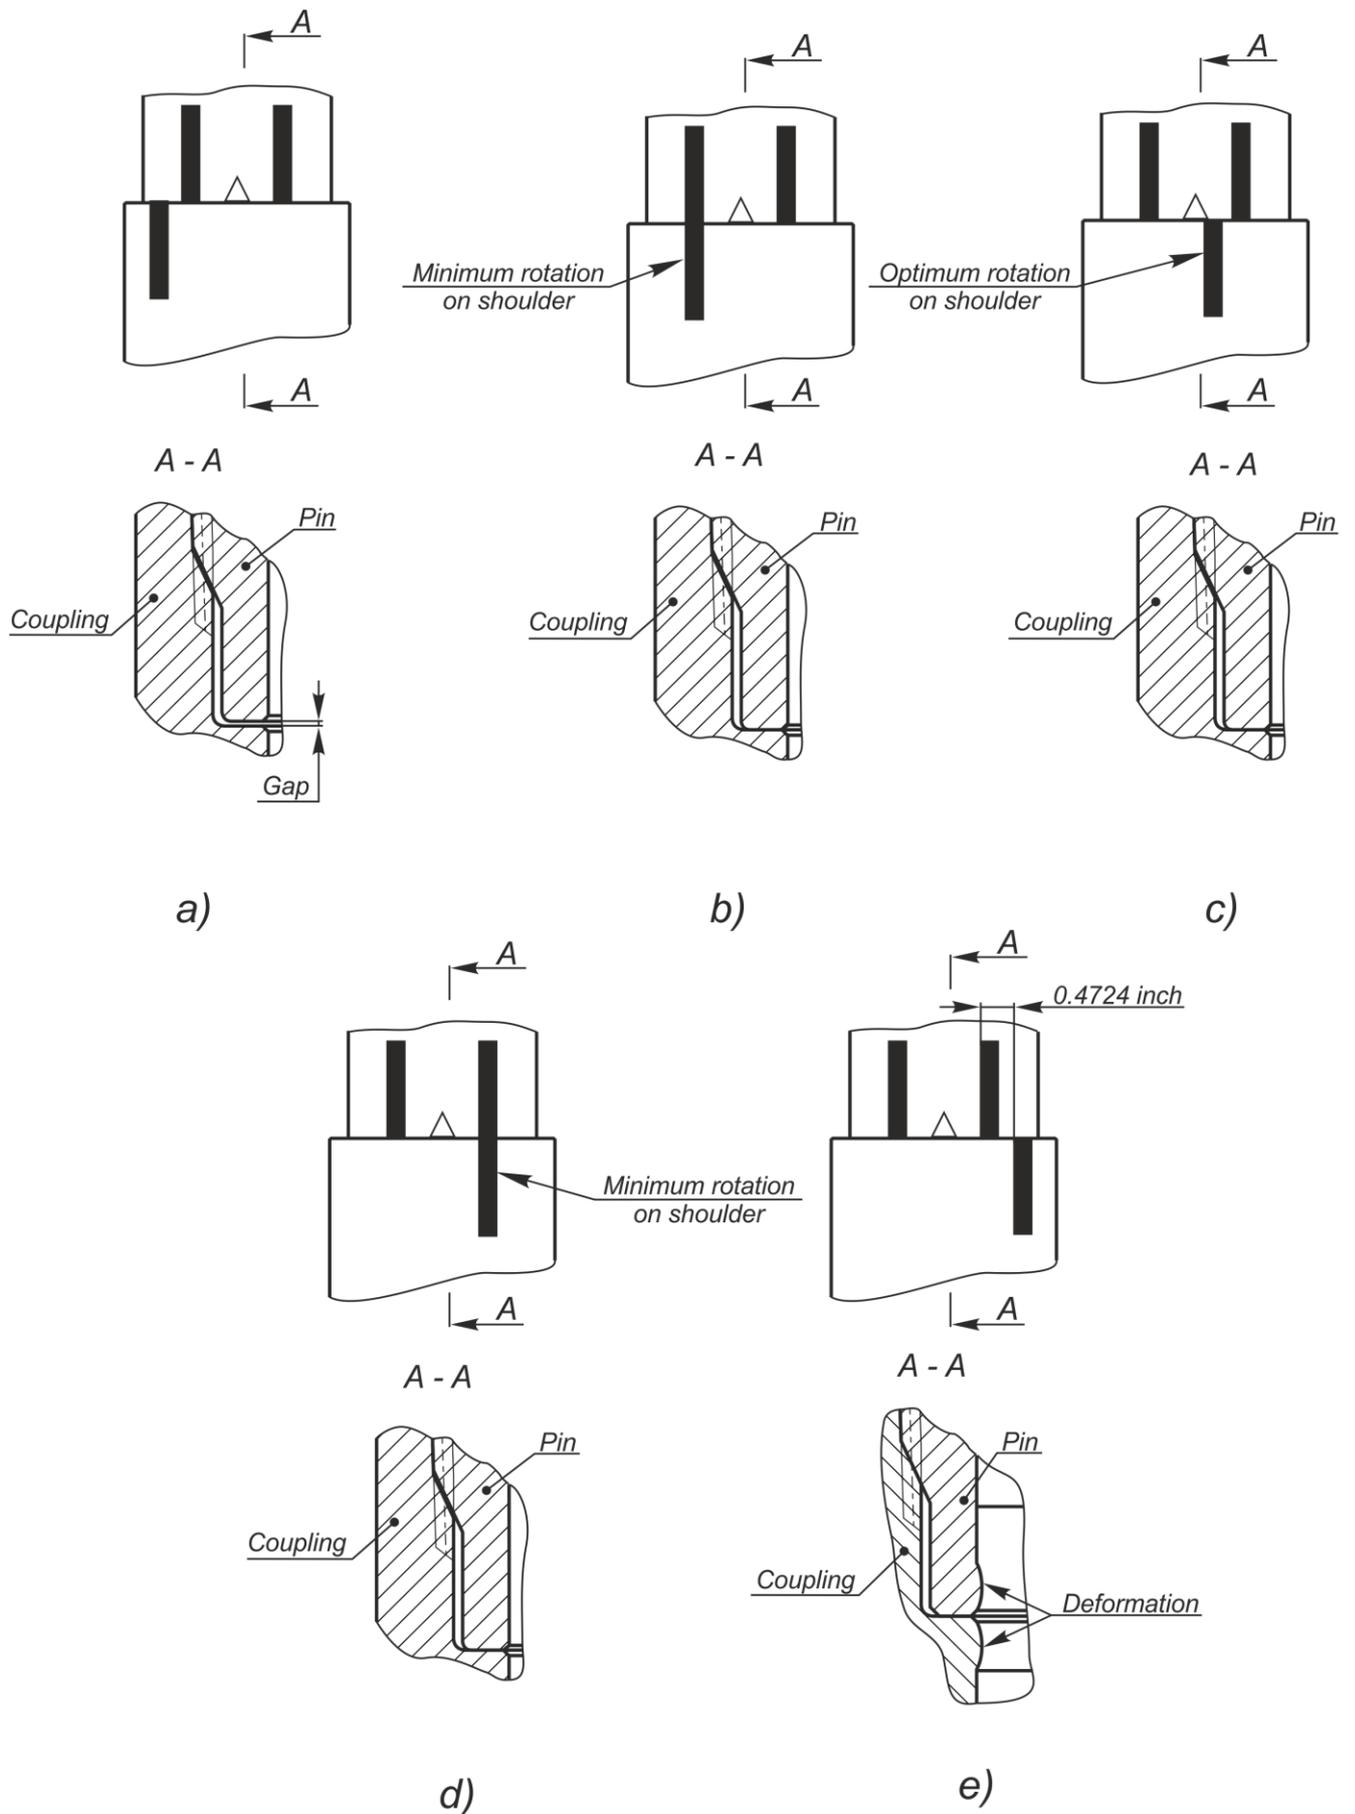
Locations of make-up marks and mating surfaces of thread shoulders
